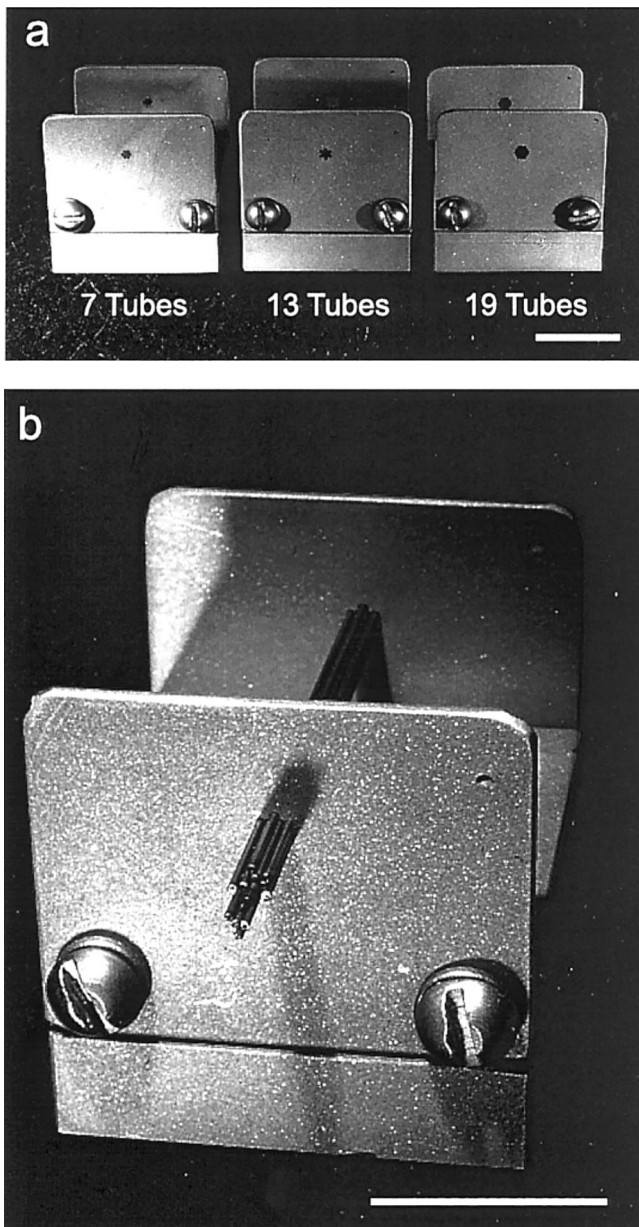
Photographs of the jigs used to assemble the guide-tube array. (a) Three jigs, machined so that the openings correspond to the outer surface of a hexagonal assembly of seven tubes (left), 13 tubes (middle) and 19 tubes (right). The openings were cut with a 0.5 mm end mill at the positions for a hexagonal lattice with a 0.018 in. lattice spacing. (b) A partially assembled guide-tube array at the level of 13 tubes. The scale bar in both panels is 0.500 in.
